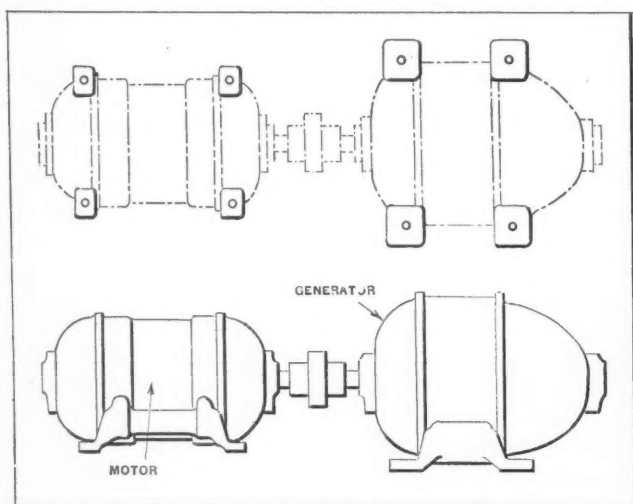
Machines for which a Welded Base is to be Provided
